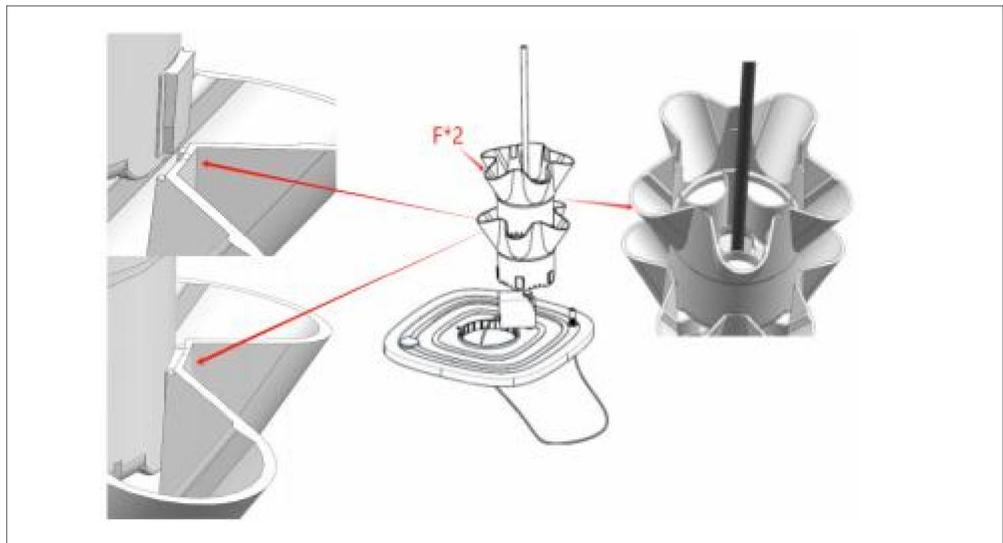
Assemble the two water towers correctly together as shown and run a hose through the centre.
